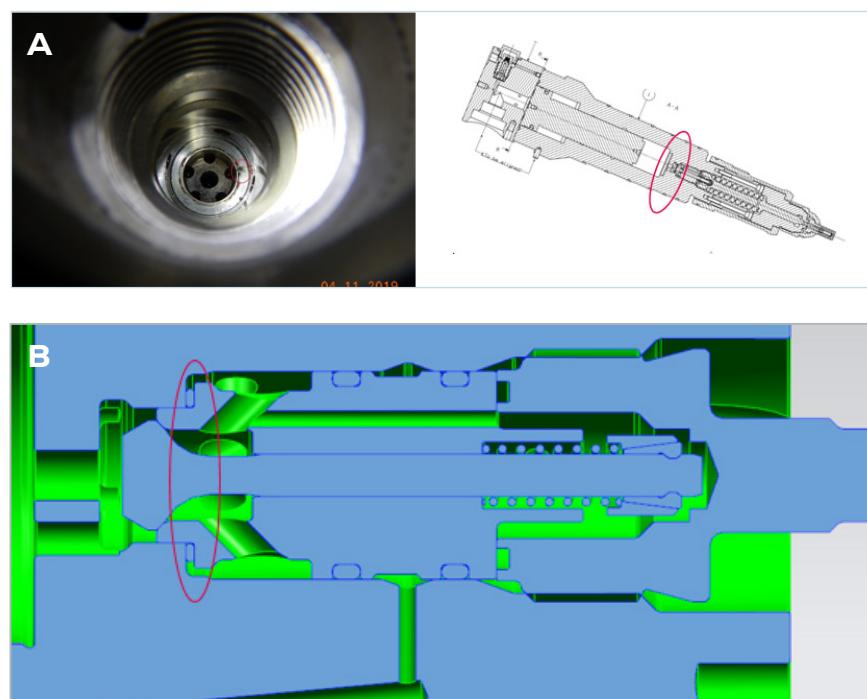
Cavitation of the suction seat (a) and new design with sealing ring (b)
